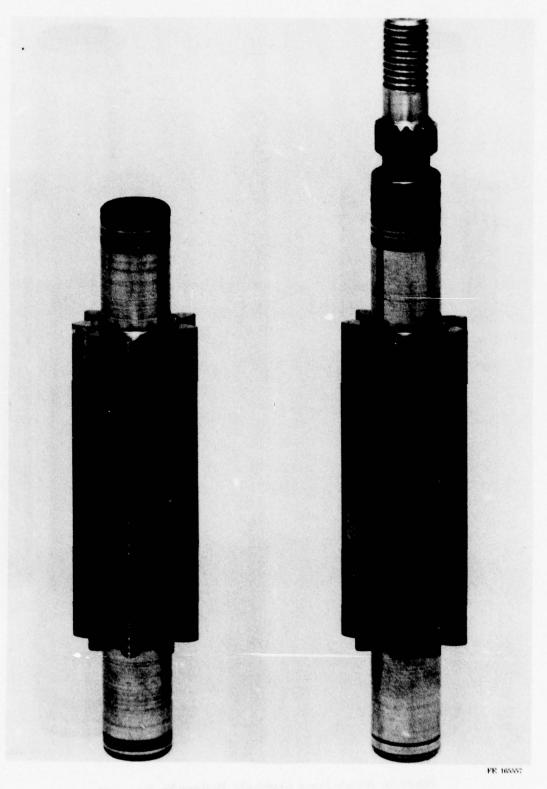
Supply Pump Gearshafts, Drive End Supply Package
